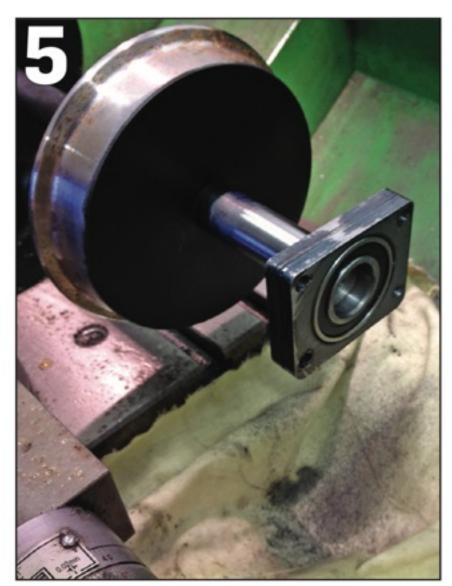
Almost there – wheel with its axle almost fitting nice and snugly into the bearing.
